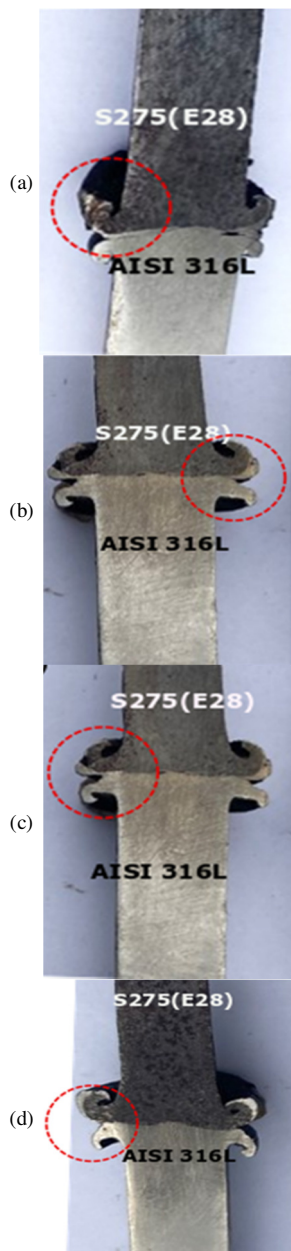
Longitudinal sections of each sample welded at rotational speeds of (a) 800 rev/min, (b) 1000 rev/min, (c) 1600 rev/min, and (d) 2000 rev/min.
